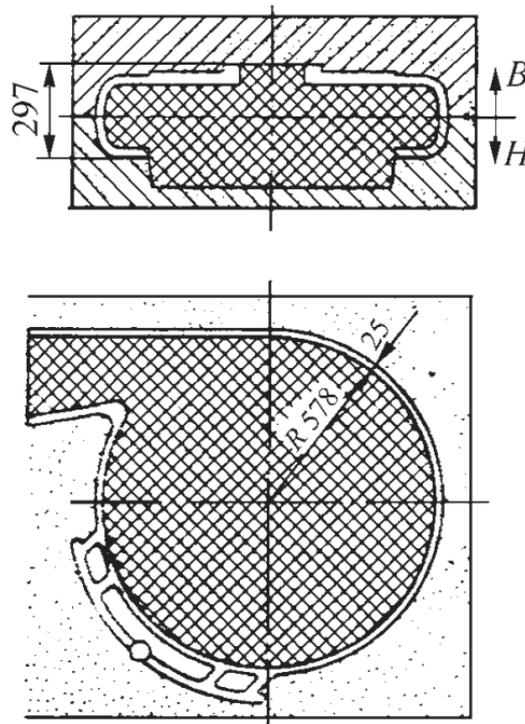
Diagram of the molding of the pump snail casting 12GR - 8 (weight about 485 kilos)
